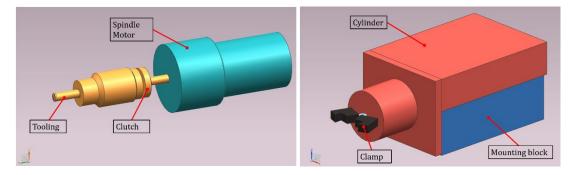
(a) Torquing motor and tool, (b) Clamp assembly.
